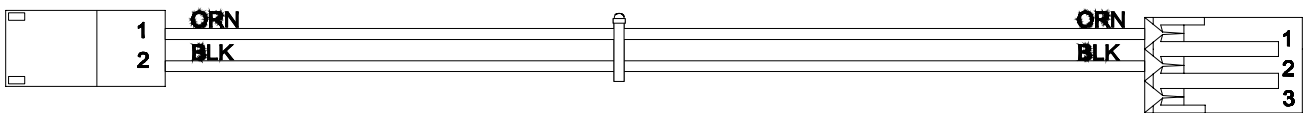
36V Yoke Reg PCB Cable Assembly
